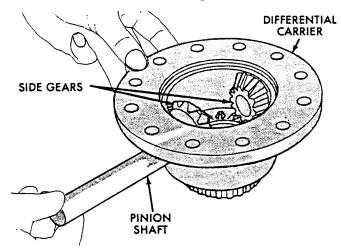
Slide Out Differential Pinion Shaft and Remove Pinion Gears and Side Gears
